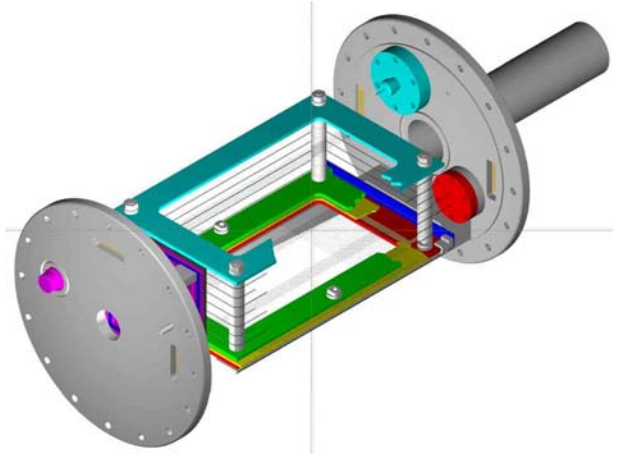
Stereo view of TPC in the final setup for μ CAP experiment
